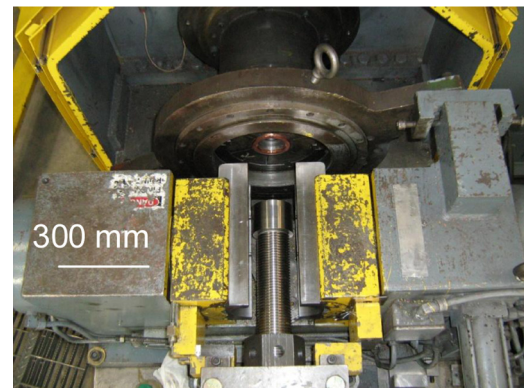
Top view of Caterpillar 250 inertia welder spindle and tooling, end ring gripped in spindle collet.
